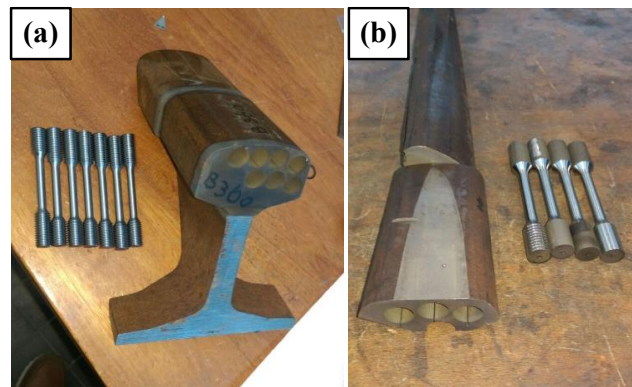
Sample preparation for uniaxial tensile test machine; (a,b) Images of specimens cut from real used rails.
